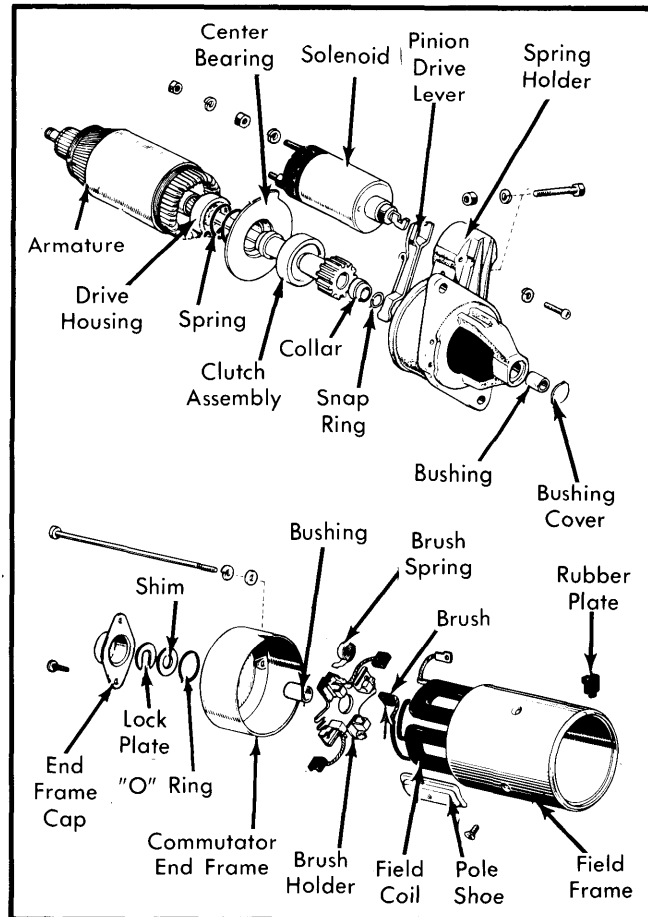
Disassembled View of Typical Nippondenso Direct Drive Starter Motor
